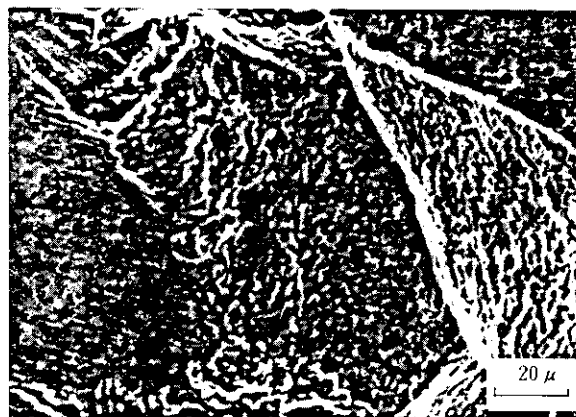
SEM image of fractured surface of hot cracking weld test specimen
